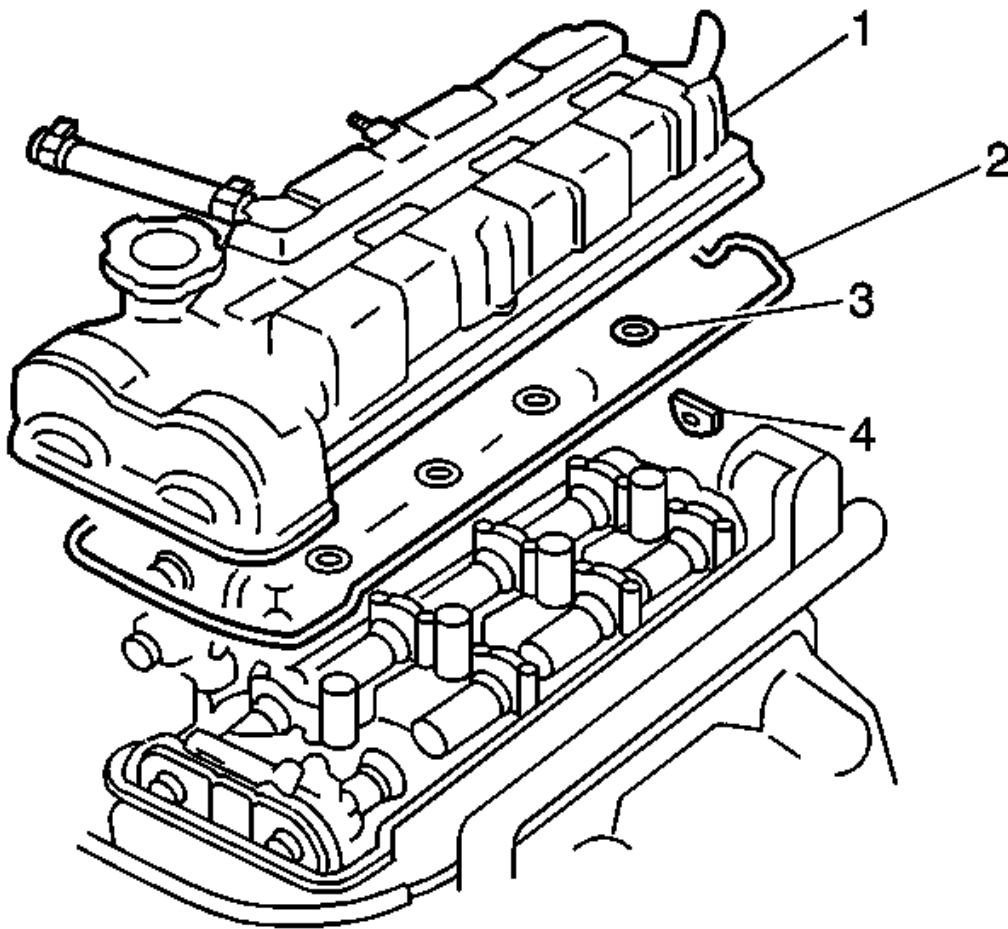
View Of Cylinder Head Cover, Gasket & O-Rings
